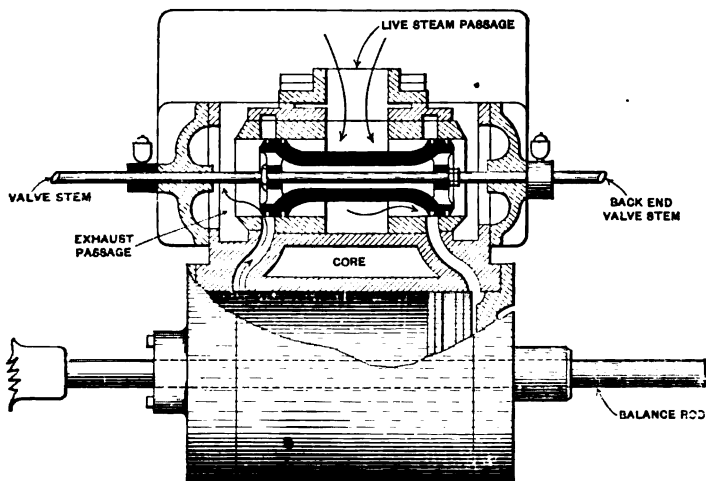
SECTION THROUGH VALVE-PORTS AND VALVE-CHEST.
